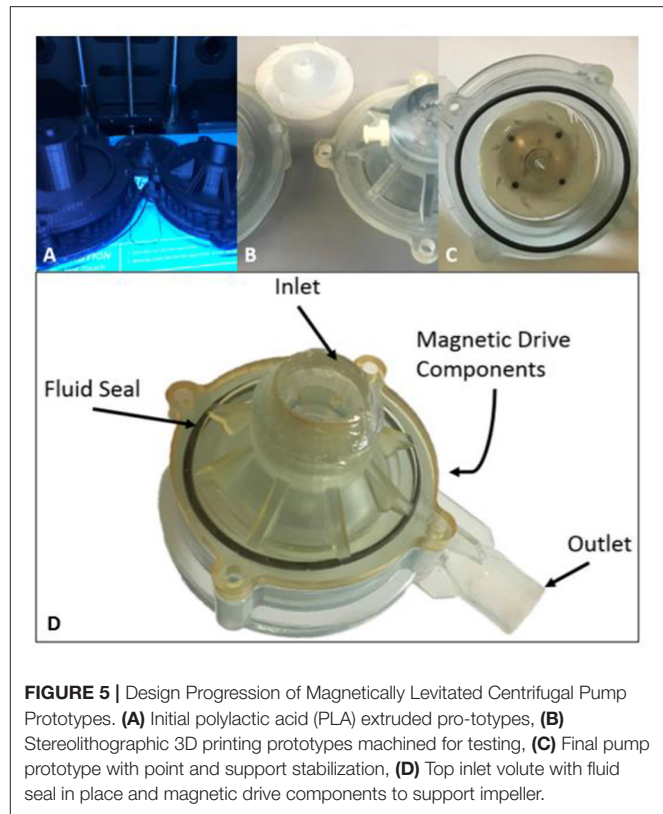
| Design Progression of Magnetically Levitated Centrifugal Pump Prototypes. (A) Initial poly(lactic acid) (PLA) extruded pro-typos, (B) Stereolithographic 3D printing prototypes machined for testing, (C) Final pump prototype with point and support stabilization, (D) Top inlet volute with fluid seal in place and magnetic drive components to support impeller.
